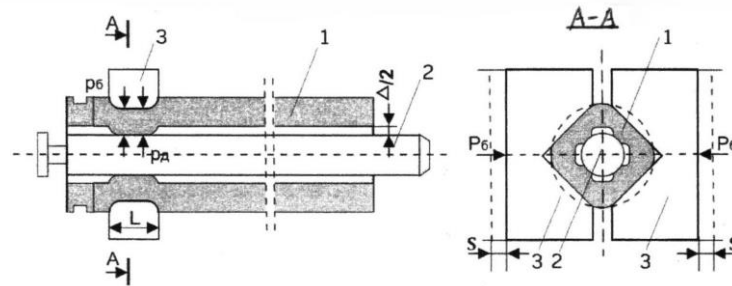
Scheme of crimping the rear end of the sleeve on a two-jaw horizontal press: 1-sleeve, 2 – mandrel, 3 – press jaws
